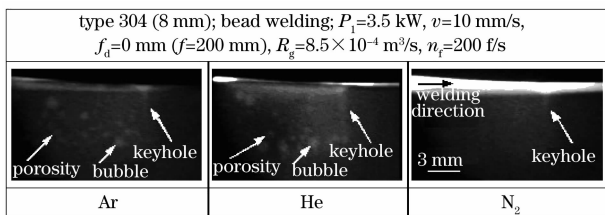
X-ray transmission observation photos of keyhole and/or bubble generation in molten pool during CW YAG laser welding of type 304 steel in Ar, He, and N<sub>2</sub> coaxial shielding gas
